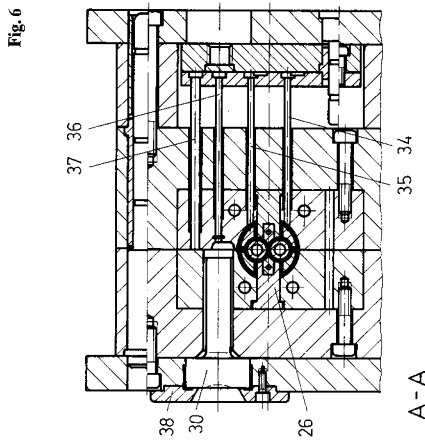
to 7 Injection mold for the valve housing of a water-mixing tap
